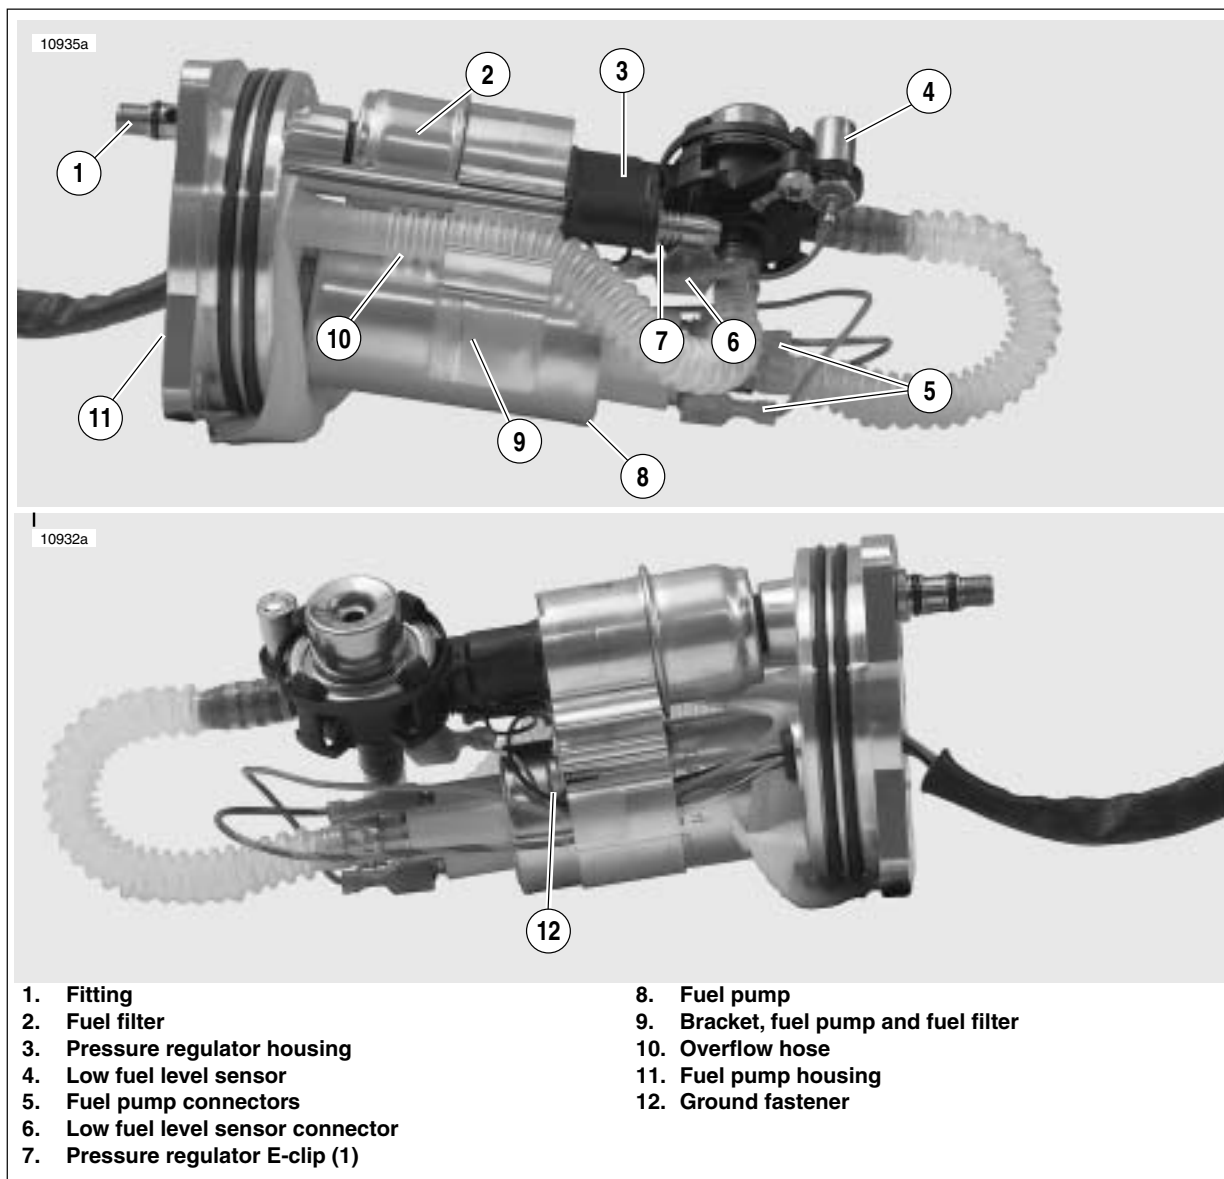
Fuel Pump Assembly (Left and Right Sides)
